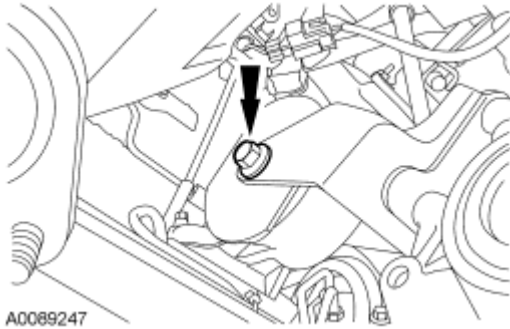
Locating RH Transaxle Support Insulator Bolt
